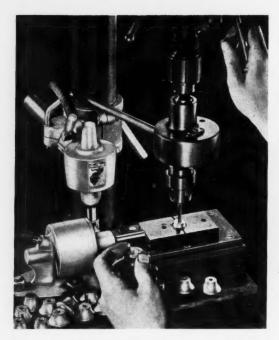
The Vertical Air-Clamp Holds the Horizontal One, Which in Turn Operates the Movable Half of a Split Clamping Dovice
